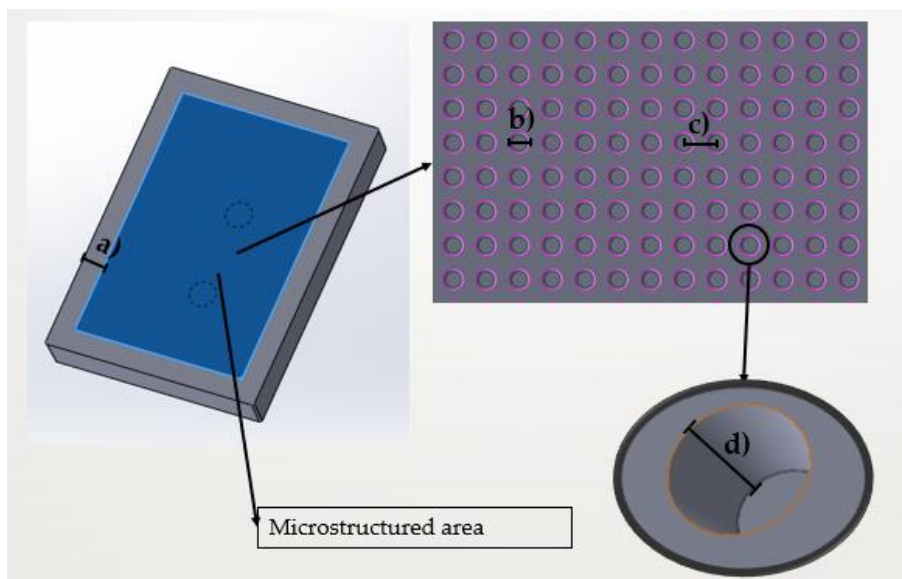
Scheme of the microstructured insert plate with cylindrical holes. a) Area of the part without holes. b) Cylinders hole diameter. c) Distance between holes. d) Cylinders depth.
